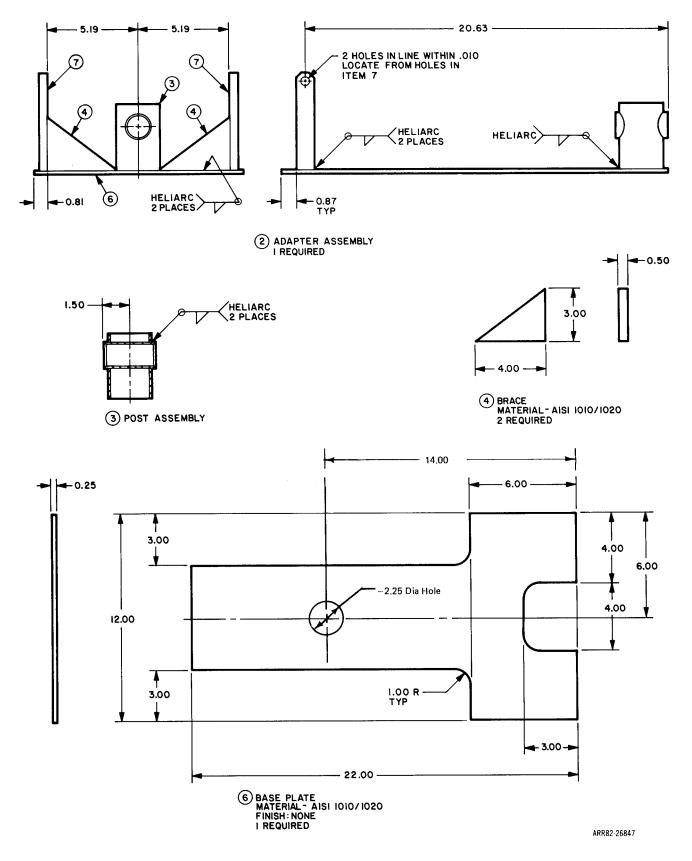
Turret Installation/Removal Fixture (Sheet 1 of 2)
